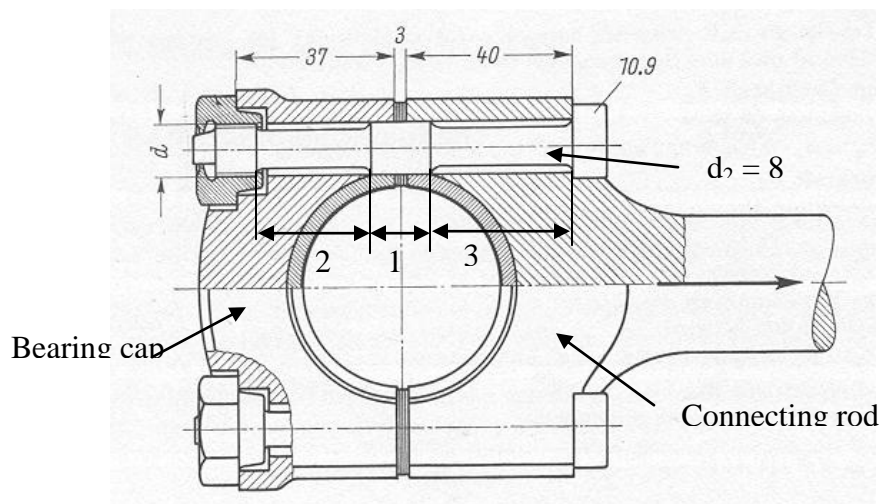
Connecting Rod Drawing and Dimensions (all dimensions are in millimeters)
